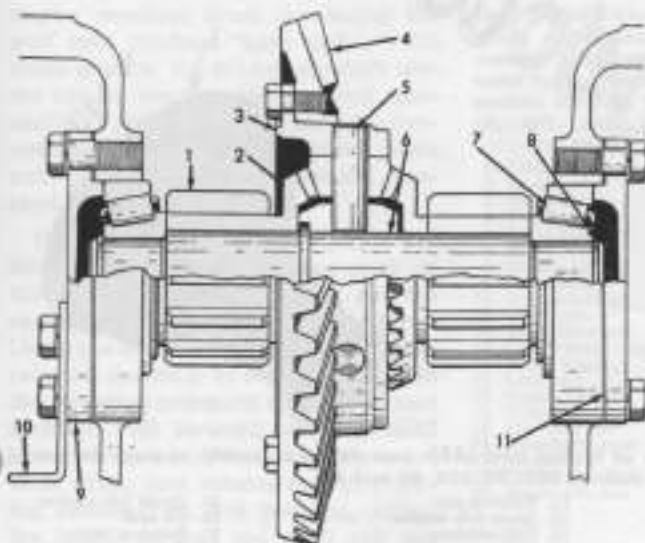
Differential assembly as used on models 201, 202, 203, 203G and early 55 and 55K models. On later models of the 55 series, bearing cap (9) is also the carrier for the bearing caps. Also, on later models, pinion gear thrust washers are used.
